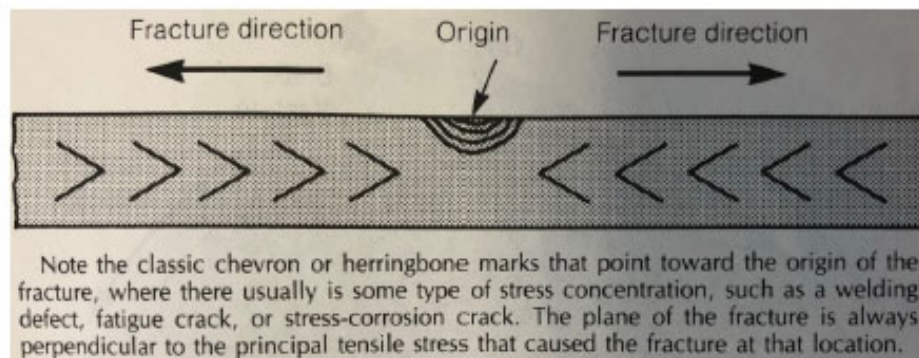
Illustration of chevron marks on a steel fracture surface.⁷⁵
